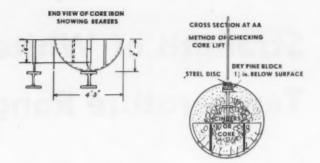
How "spring" is avoided in bend pipe core during casting. Section AA refers to Figure 12.
